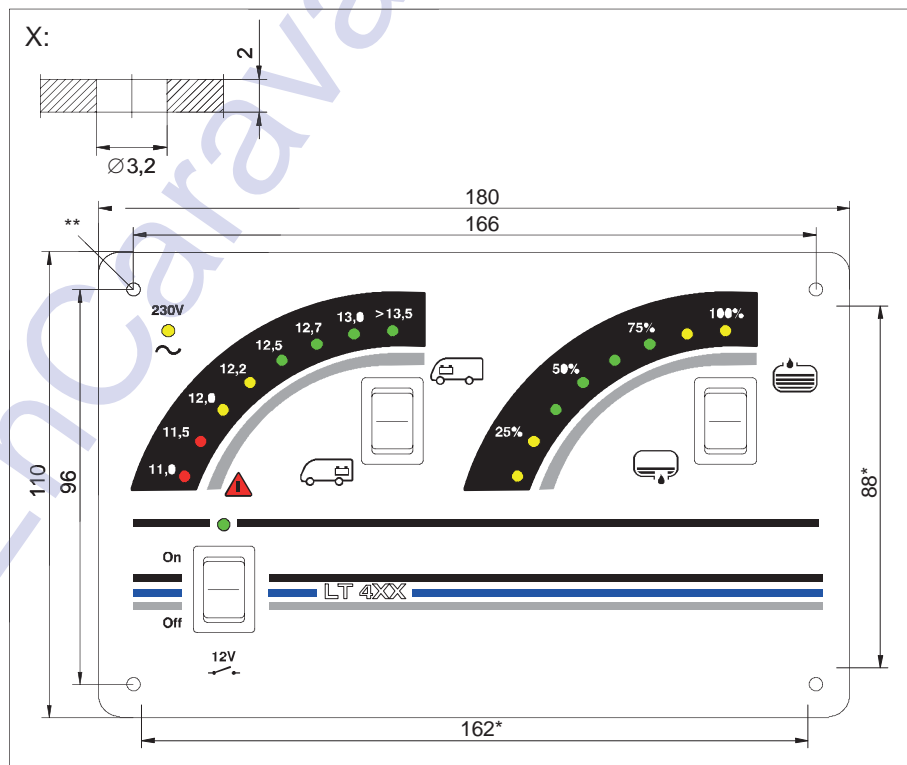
Dimensional diagram for LT 410 a, LT 419 switch panel (dimensions in mm)
